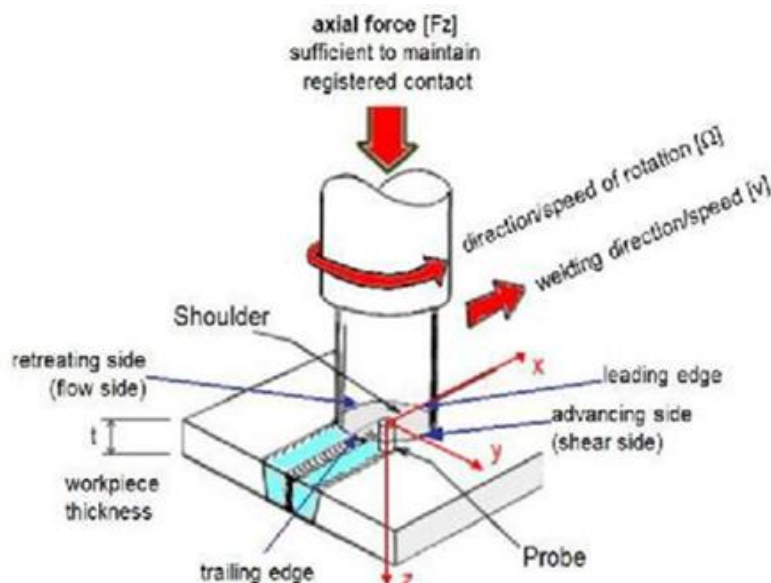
Friction stir processing /Welding <sup>[1]</sup>
